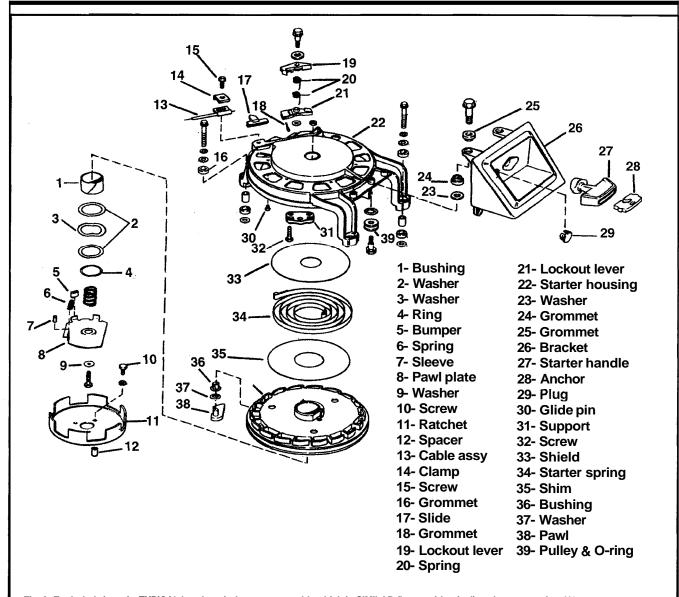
Exploded view of a TYPICAL hand-rewind starter assembly which is SIMILAR (but not identical) to the one used on V4 motors
